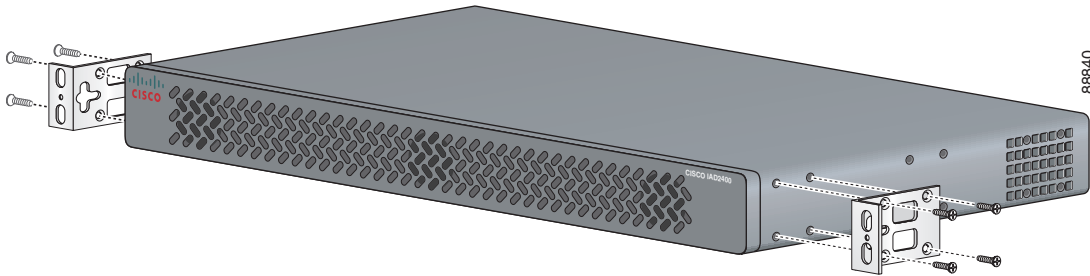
19-Inch Rack-Mounting with Back Panel Forward
